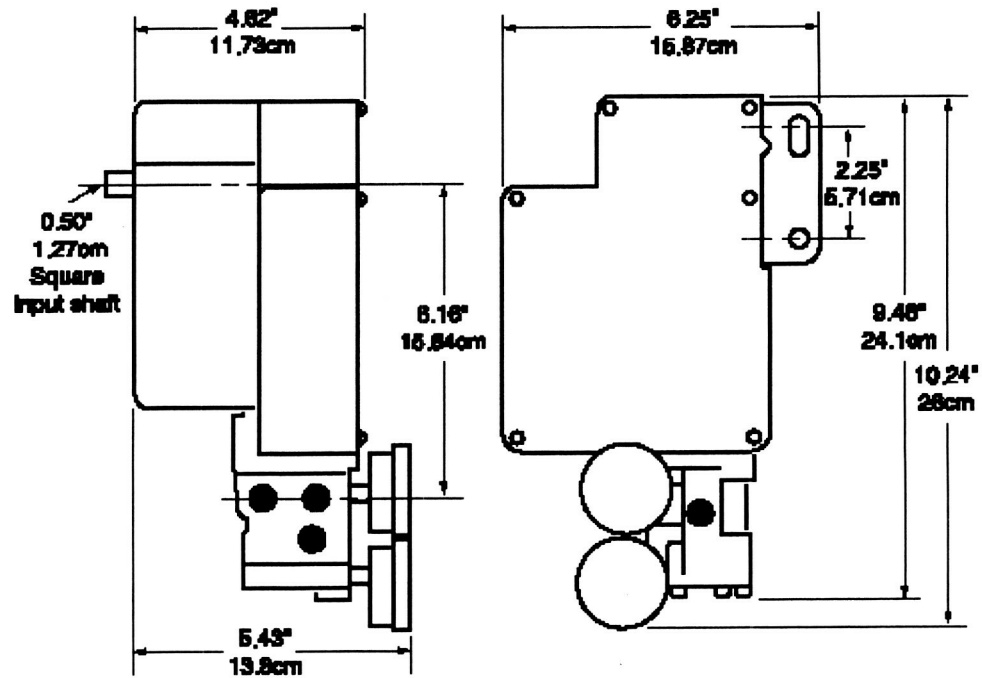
GOX control valve PCV-6 Moore positioner drawing.
